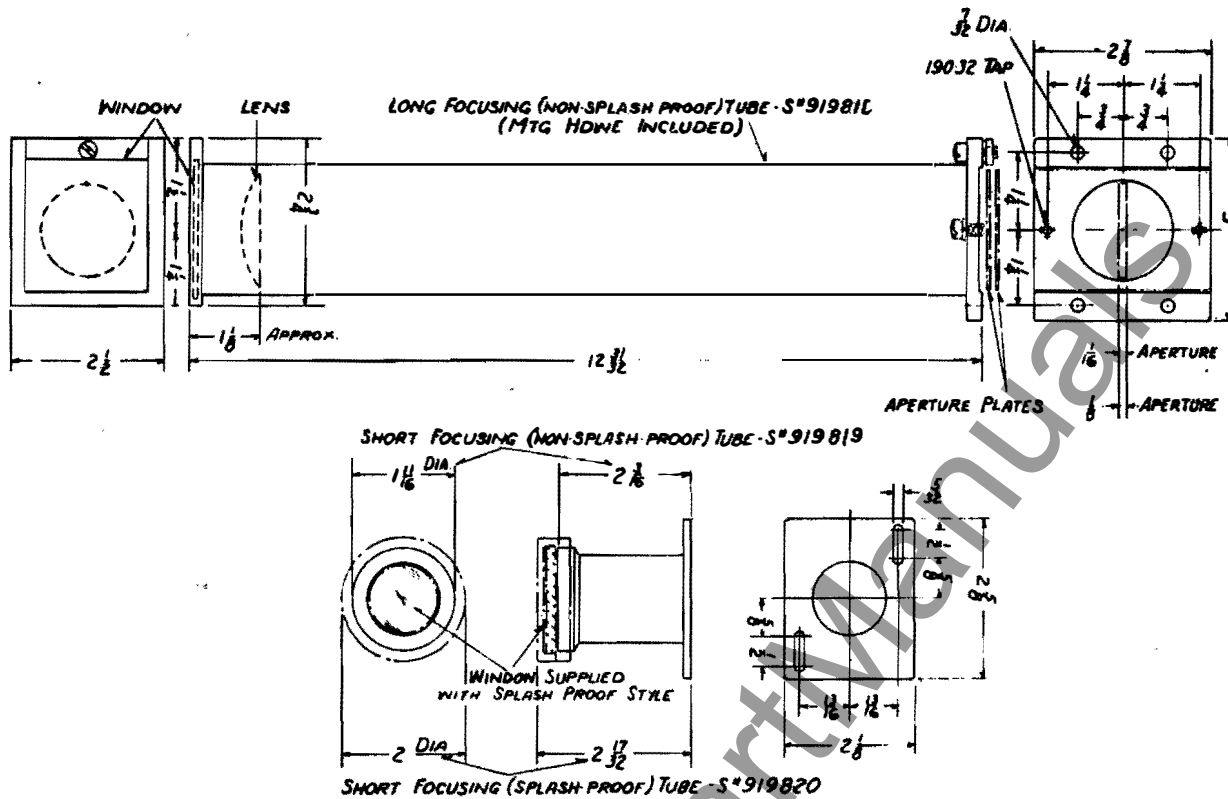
Outline Drawing for long Focusing Tube, Style No. 919818, and short Focusing Tube, Style No. 919820
